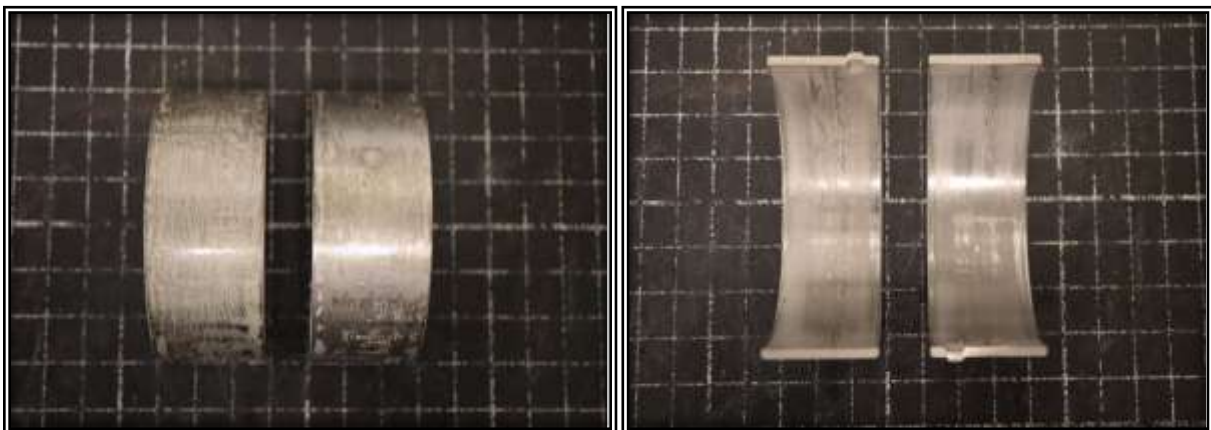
The connecting rod bearings after being removed from the number 1 connecting rod assembly. Two deep wear marks are present on one of the bearings.
